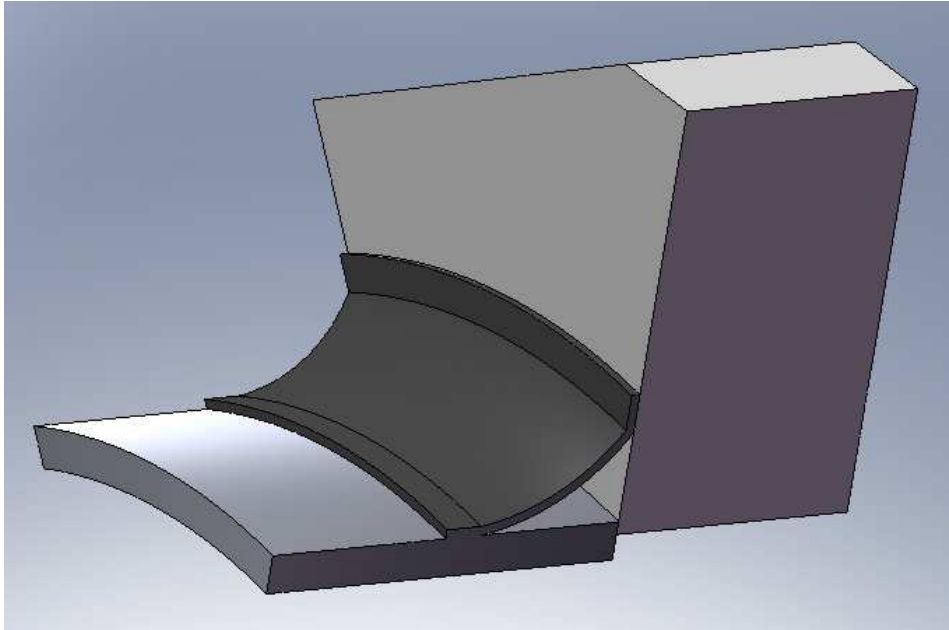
Cropped View of the Seal Ring – Metal Cloth Assembly
